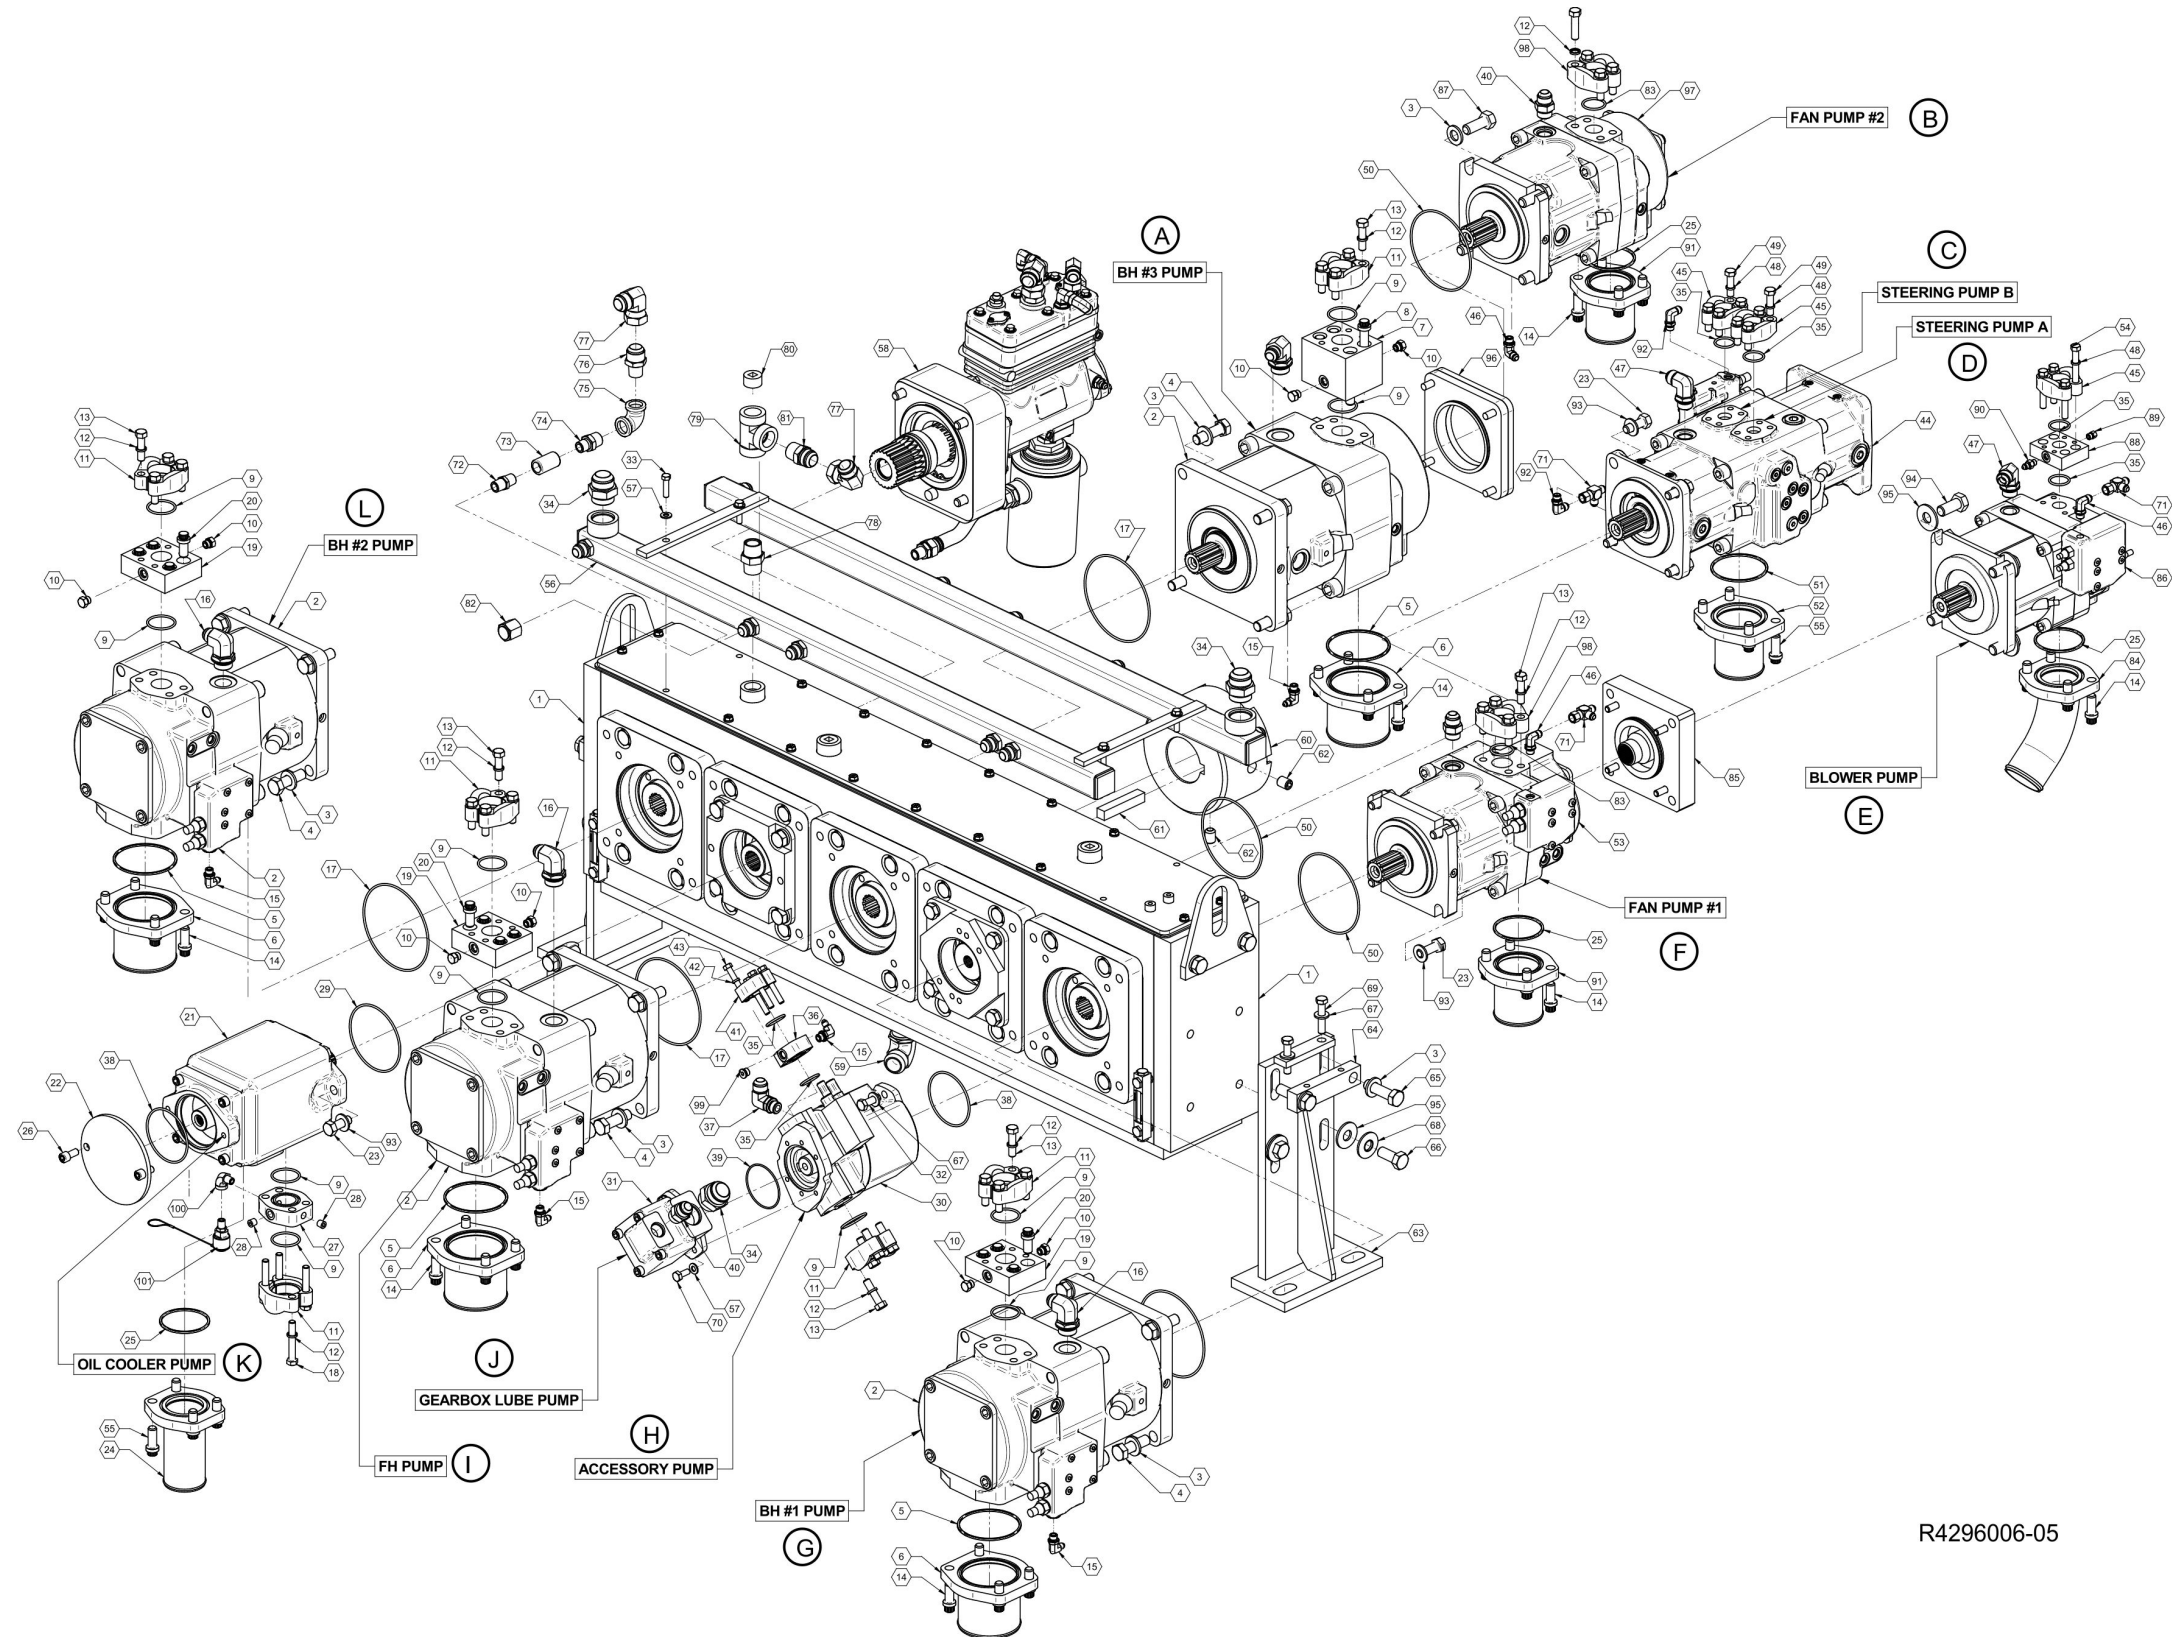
HPD gearbox and pumps Tier 2 engine (typical)
